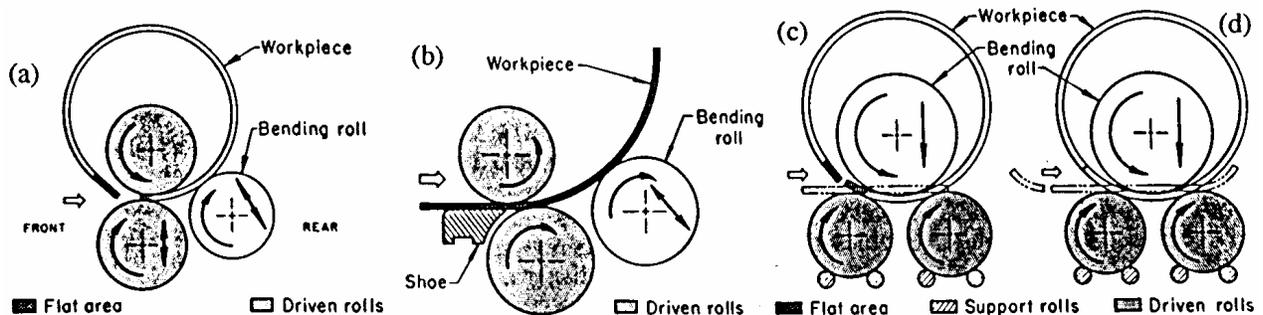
End views of different setups for three-roll forming. (a)—Conventional pinch-type machine. Note large flat area on the leading end and smaller flat end on trailing end. (b)—Shoe-shape machine with two powered rolls. (c) and (d)—Arrangement of rolls in a pyramid-type machine. Note flat leading and trailing ends shown in (c) are minimized in (d) by prebending.²³
